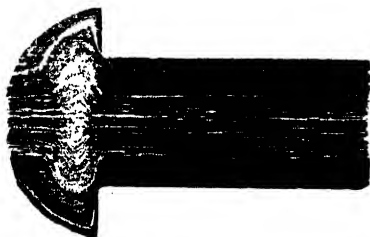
Etched section of cold-headed rivets. The flow lines indicate how the metal is displaced and why the head is stronger than if the rivet was cut from bar stock without upsetting.
